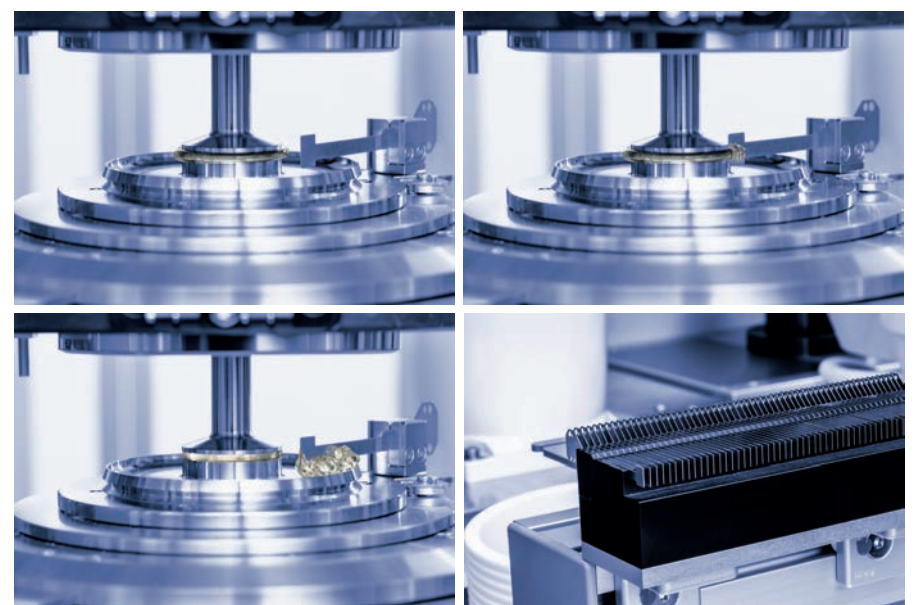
Blade of the trimming tool before, during and after the trimming process; and blade rack with disposable blades.
